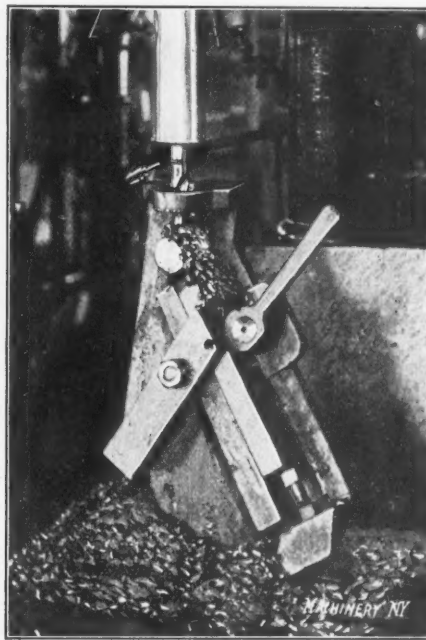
Simple Form of Chuck for Drilling the Cutter Hole in Off-set Tool-holders
